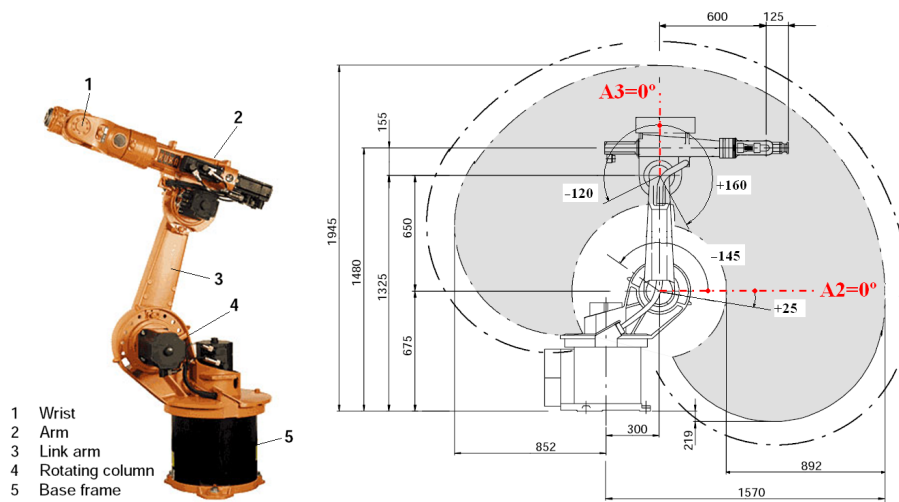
Parts of the KR15/2 manipulator and main dimensions.
